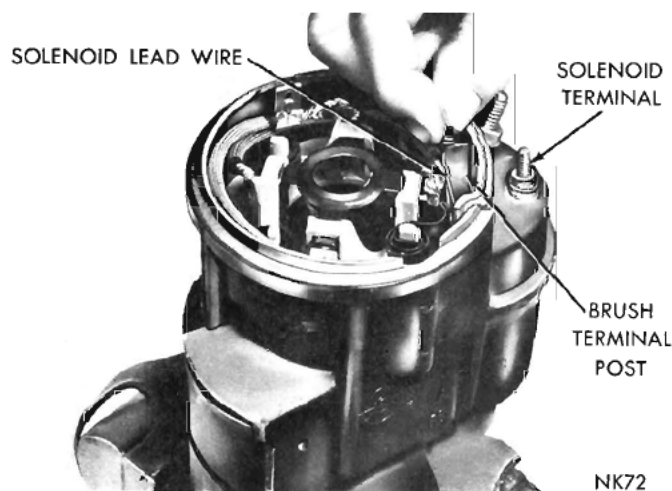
Unwinding or Winding the Solenoid Lead Wire
